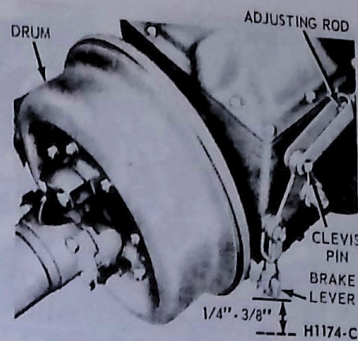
Shoe-Type Parking Brake—Twelve Inch Drum
